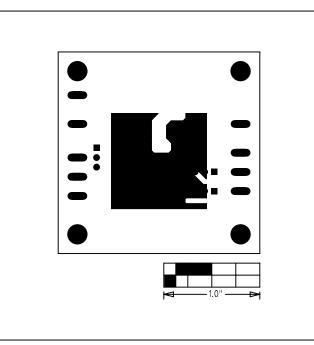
MAX17504 3.3V Output EV Kit Component Placement Guide—Bottom Solder Mask
